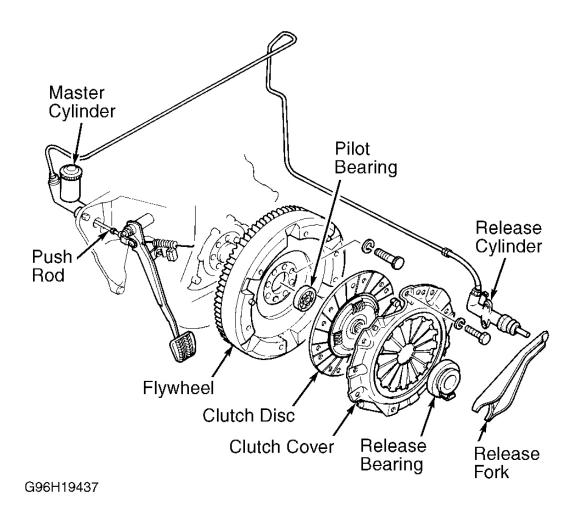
Exploded View Of Clutch Assembly (Typical) Courtesy of MAZDA MOTORS CORP.
